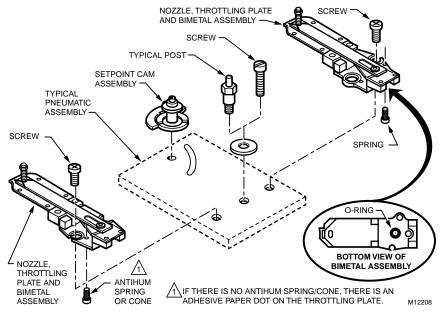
Nozzle, Throttling Plate, Bimetal Assembly Replacement.
